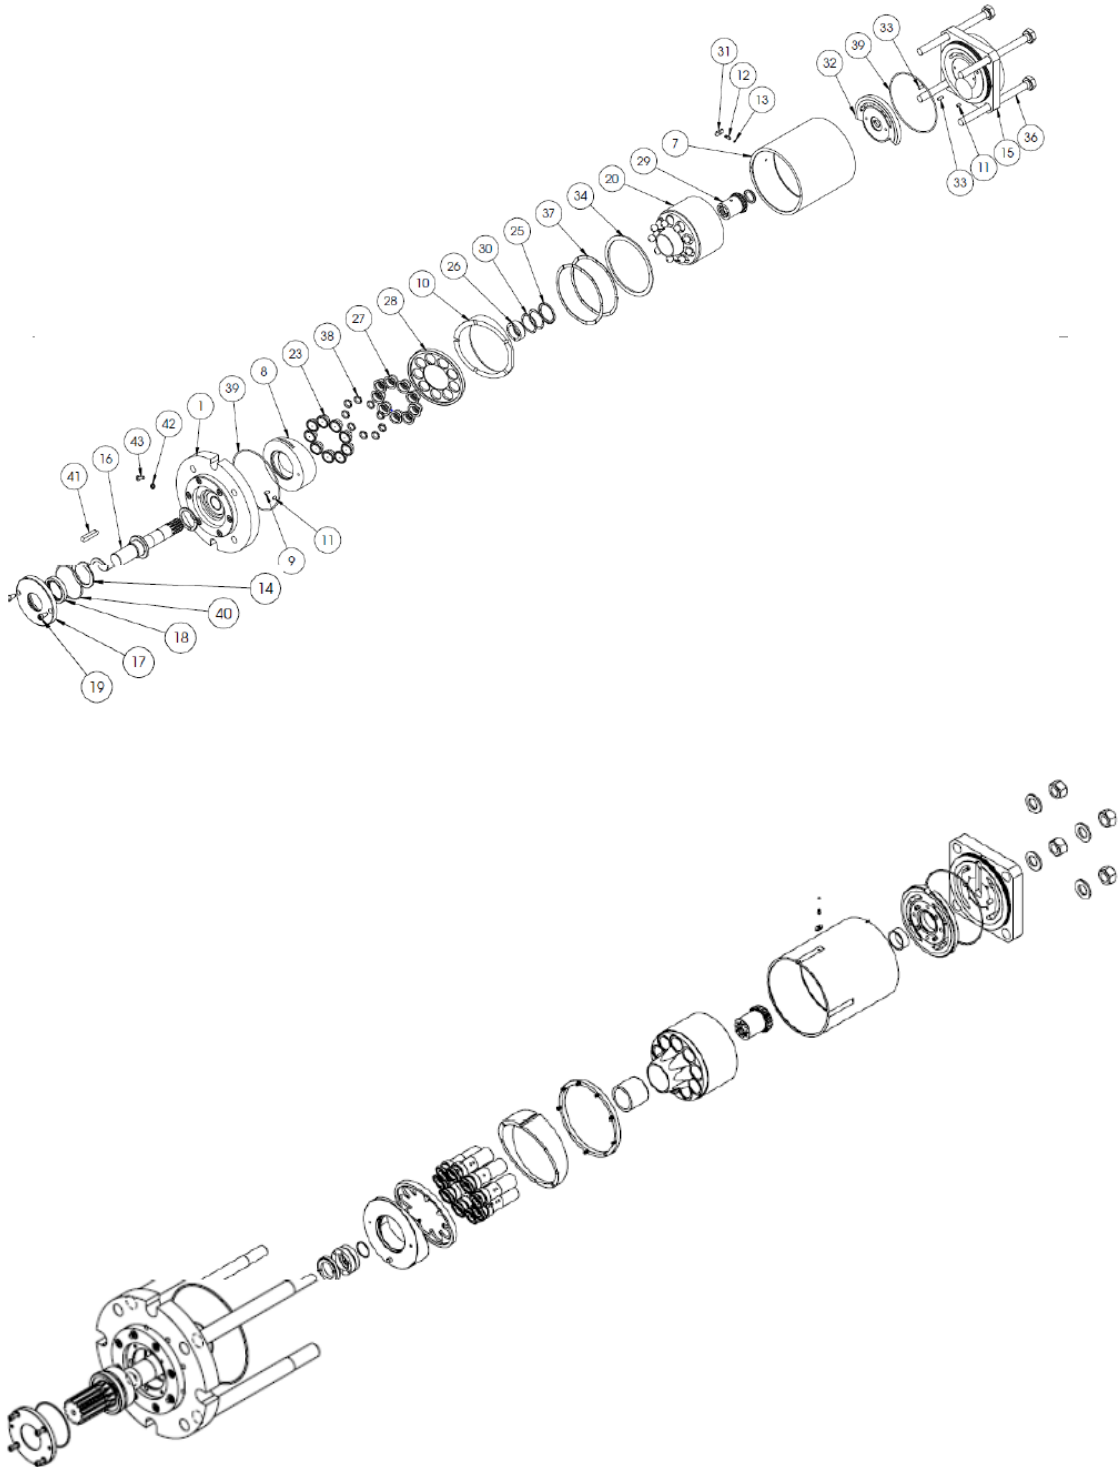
Exploded view of NOVA P60 and NOVA P180 as shown above
